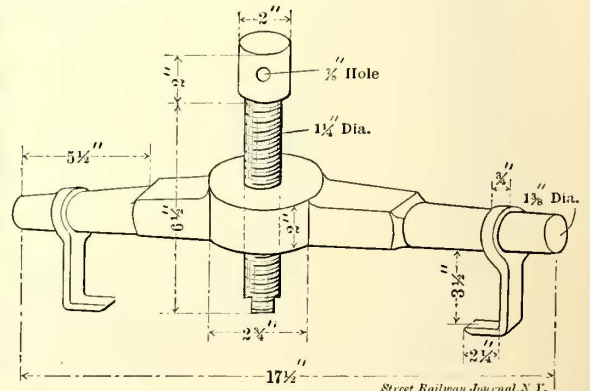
SCREW JACK FOR REMOVING FIELD COILS FROM POLE PIECES
